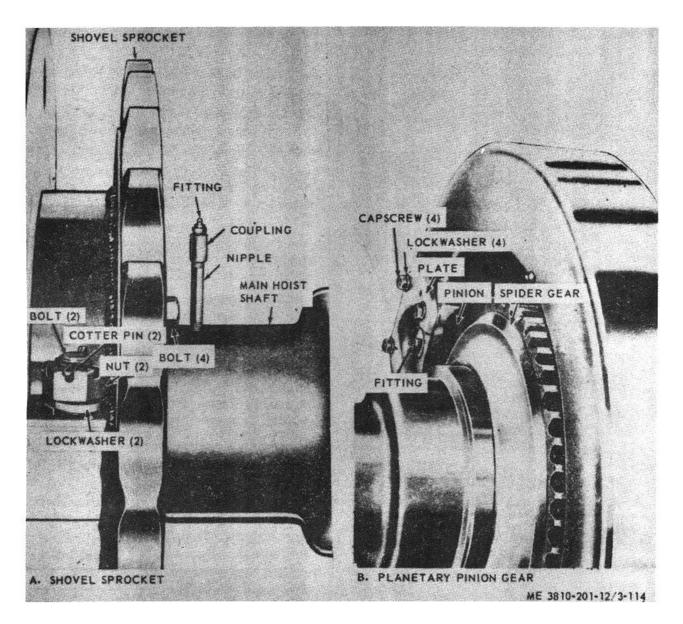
Shovel sprocket and planetary pinion gear, removal and installation.
